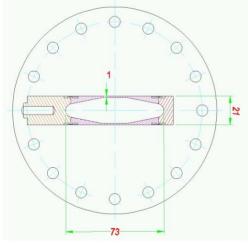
A machined 316LN SS TIG welded and the CF 100 flange
